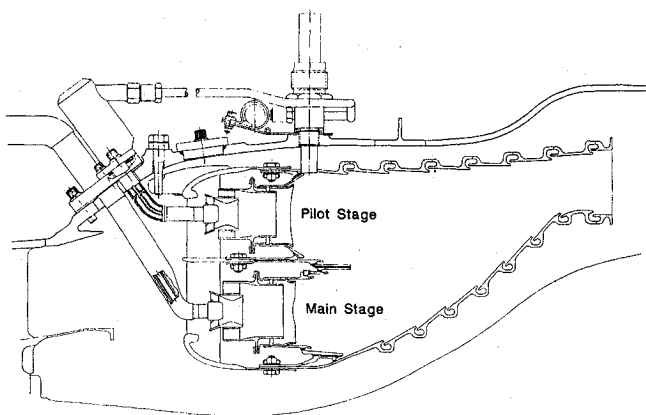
Cross-sectional drawing of ECCP/CF6-50 dual annular combustor.
